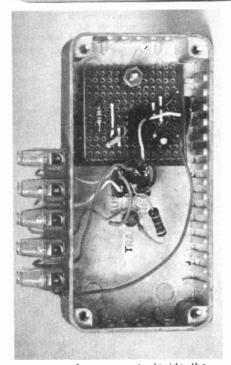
(above). Interior of the control unit showing the circuit board layout, board mounting and interior wiring.
